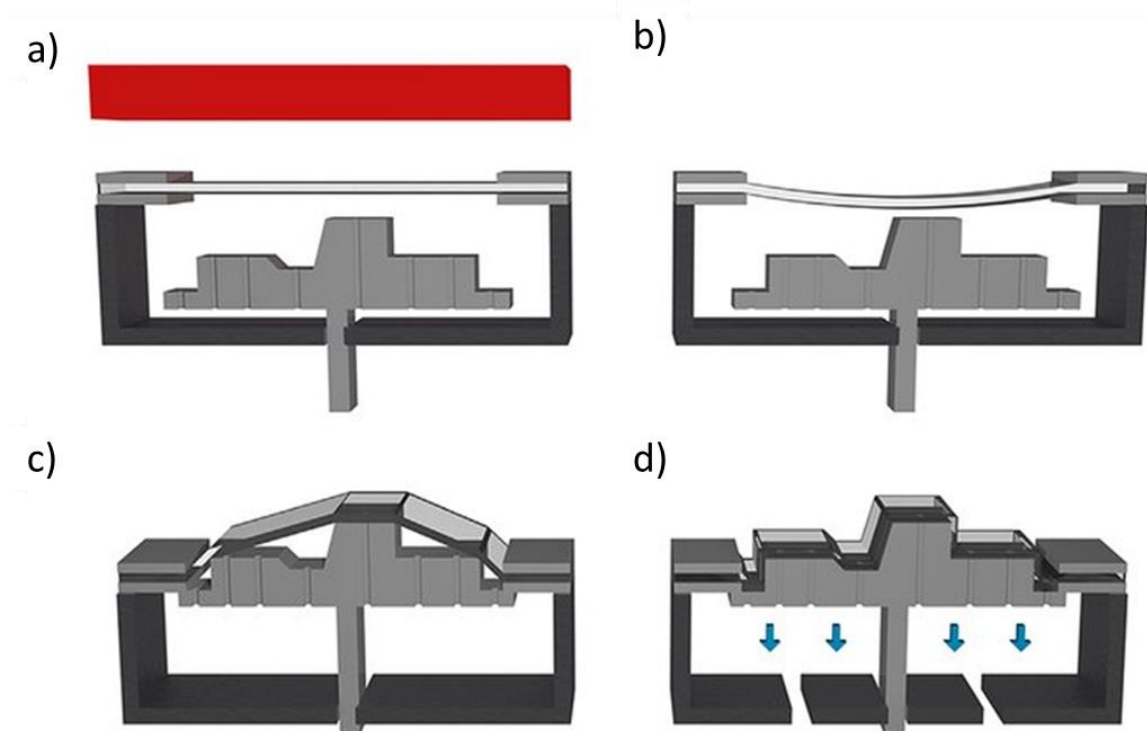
Vacuum forming process flow; (a) Thermoplastic sheet is clamped in a frame and heated; (b) The heater is removed once the sheet reached forming temperature, at this point the sheet sags; (c) The mold is pressed up against the sheet by a hydraulic cylinder; (d) A vacuum applied from below forces the sheet against the surface of the mold until it is sufficiently cooled down and rigid again for removal after the metal mold moves away [9].
